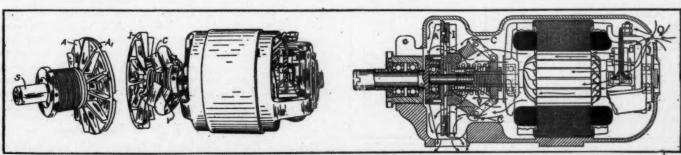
A,Gray & Davis' driving clutch and commutator; B, section of dynamo showing relation of parts and manner of cooling
